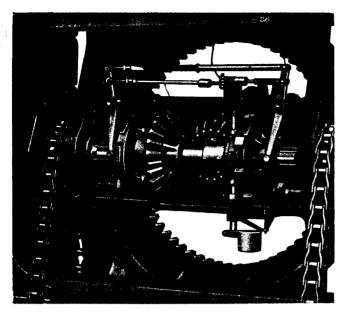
'Worm's Eye View' of Truck Frame Machinery, with Gear Case Cover and Clutch Guards removed.
